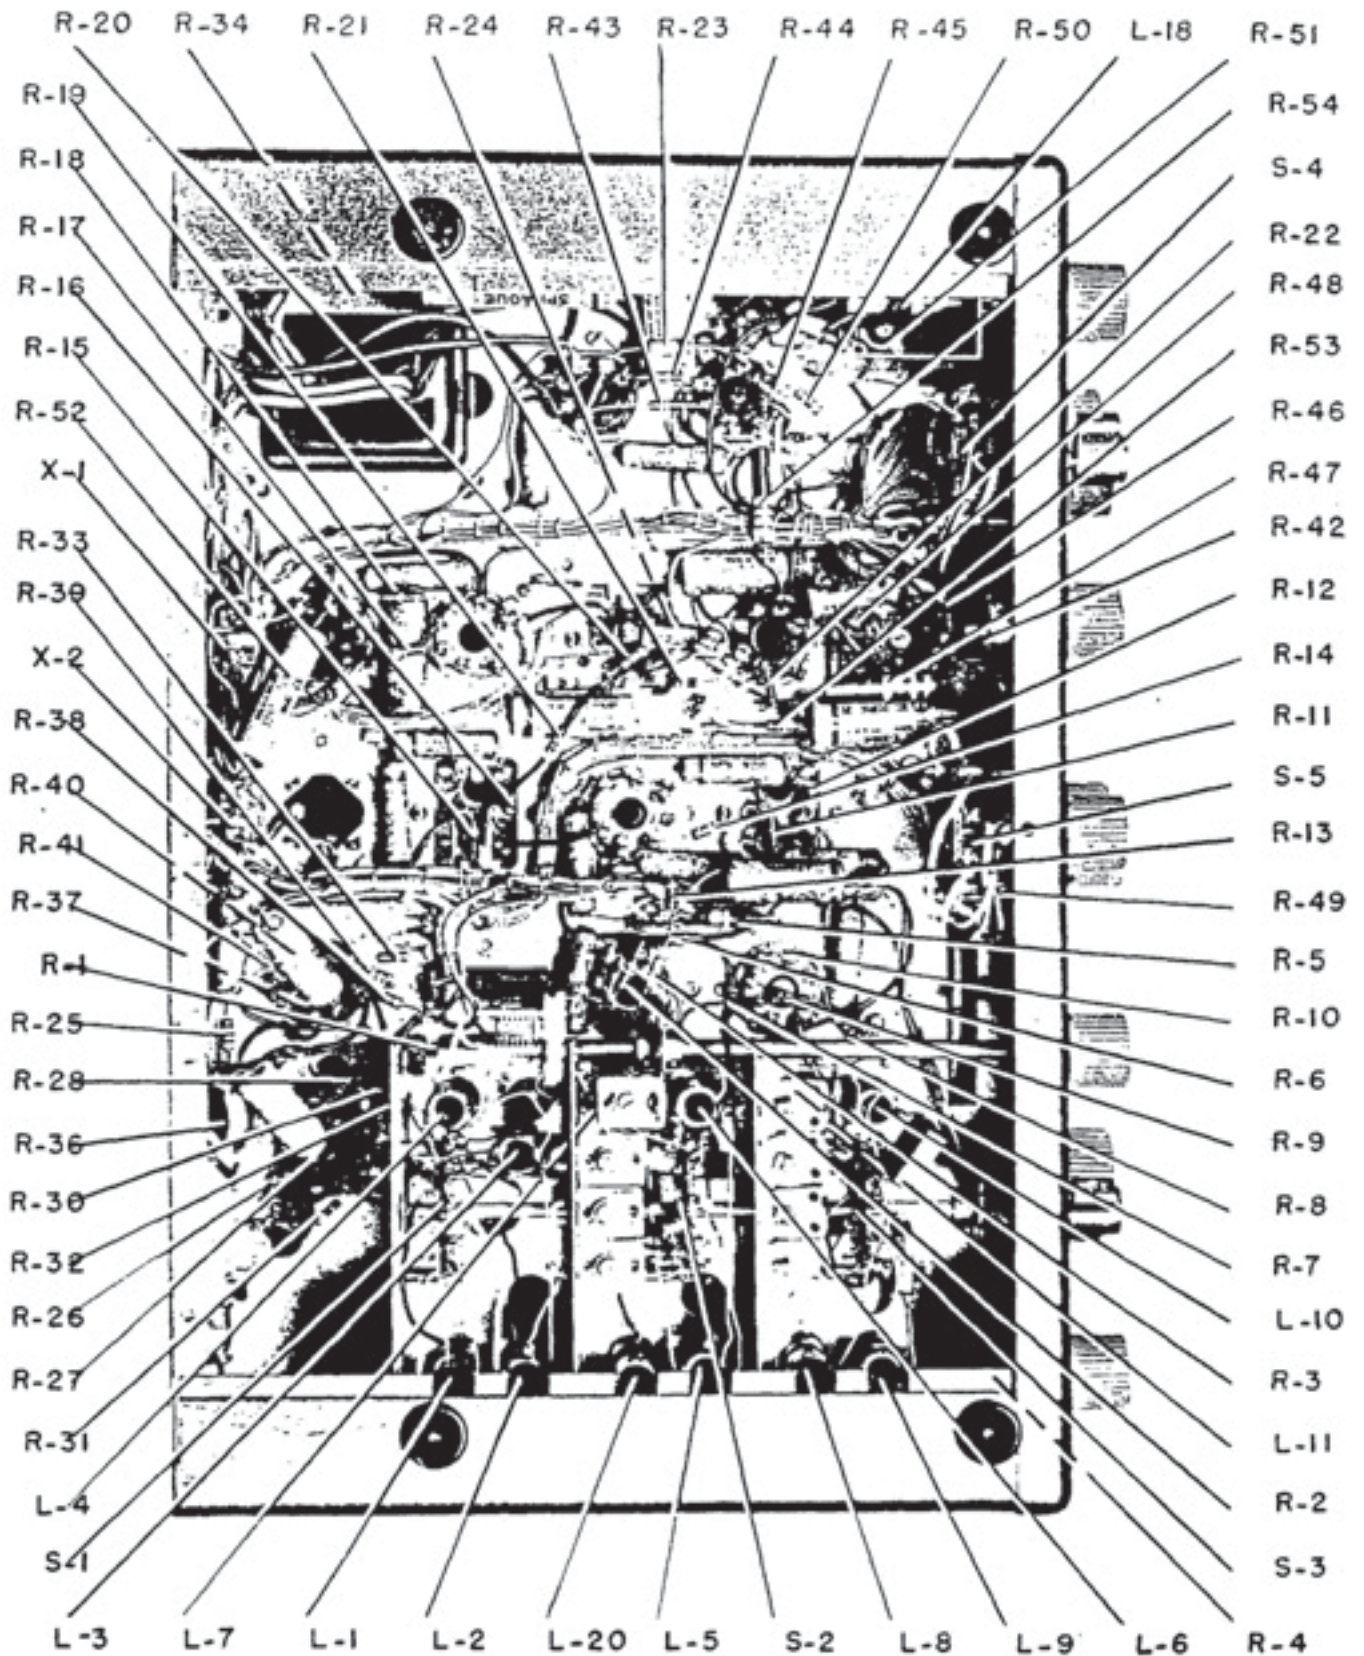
Resistor and other Component Locations, Bottom View of Receiver
